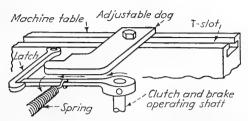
Simple type of stop mechanism for limiting the stroke of a reciprocating machine member. Arrows indicate the direction of movement.
